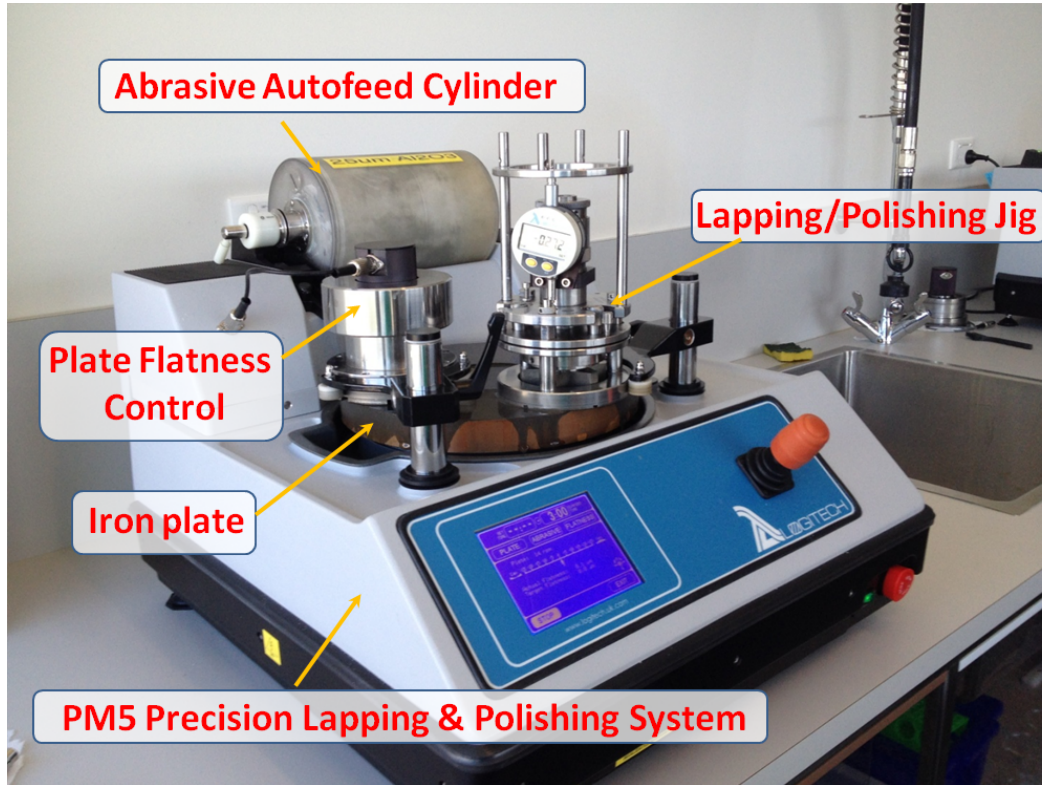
Photograph of the lapping setup. The sample is mounted on the lapping/polishing jig. The cylinder with the abrasive continuously feeds the abrasive onto the rotating iron plate. The plate flatness jig is connected to the system and measures the flatness of the iron plate.
